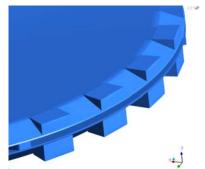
J-groove at the back of impeller $(24^n \times 13.5^w \times 4.5^d \times 8^l)$
